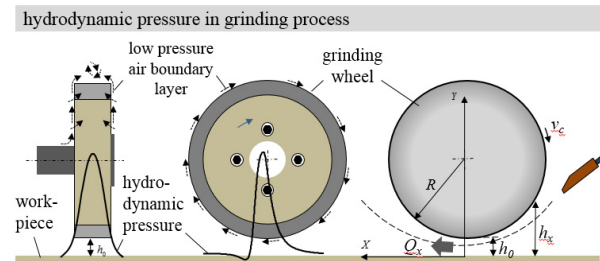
The hydrodynamic pressure in the contact-zone between the grinding wheel and workpiece
